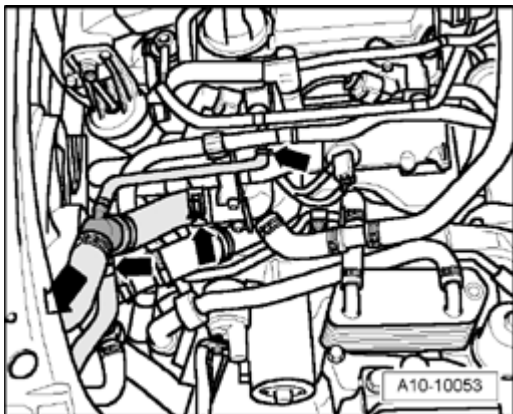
Removing Upper Coolant Hose Leading To Radiator
